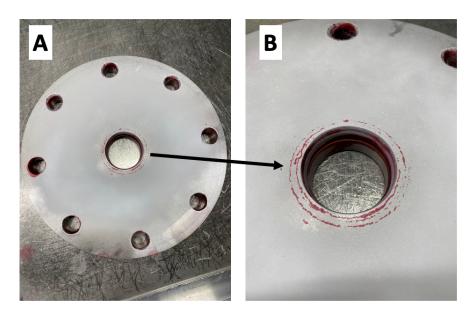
Results form the performed penetration test a) overview of the hole clad surface b) indicating of crack and defects on the surface.
